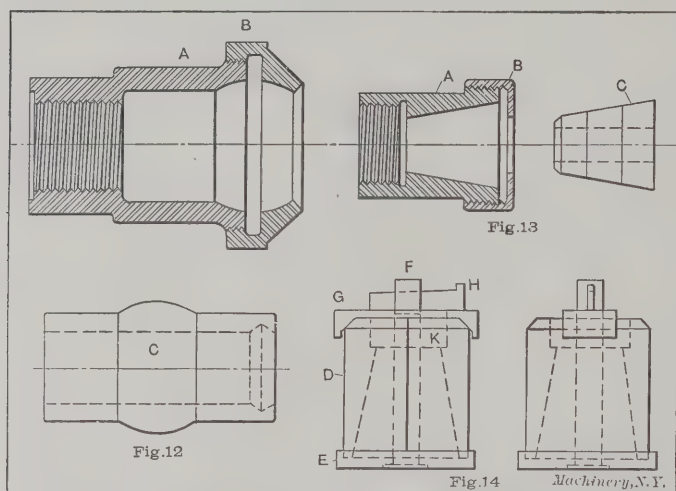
Simple Chuck in which Bearing *C* is bored. Fig. 13. Chuck for Boring Part *C*. Fig. 14. Babbitting Jig in which Part *C* is cast
